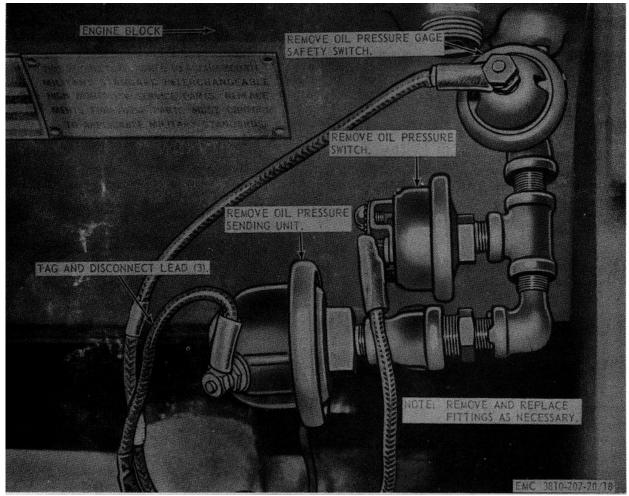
Oil pressure sending unit, safety switch, and oil pressure switch, removal and installation
